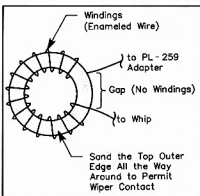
Winding on Ferrite Core. Use 60 turns #26 enamelled copper wire on a Palomar F82-61 ferrite core. Sand enamel on top outer edge to allow contact with wiper contact
